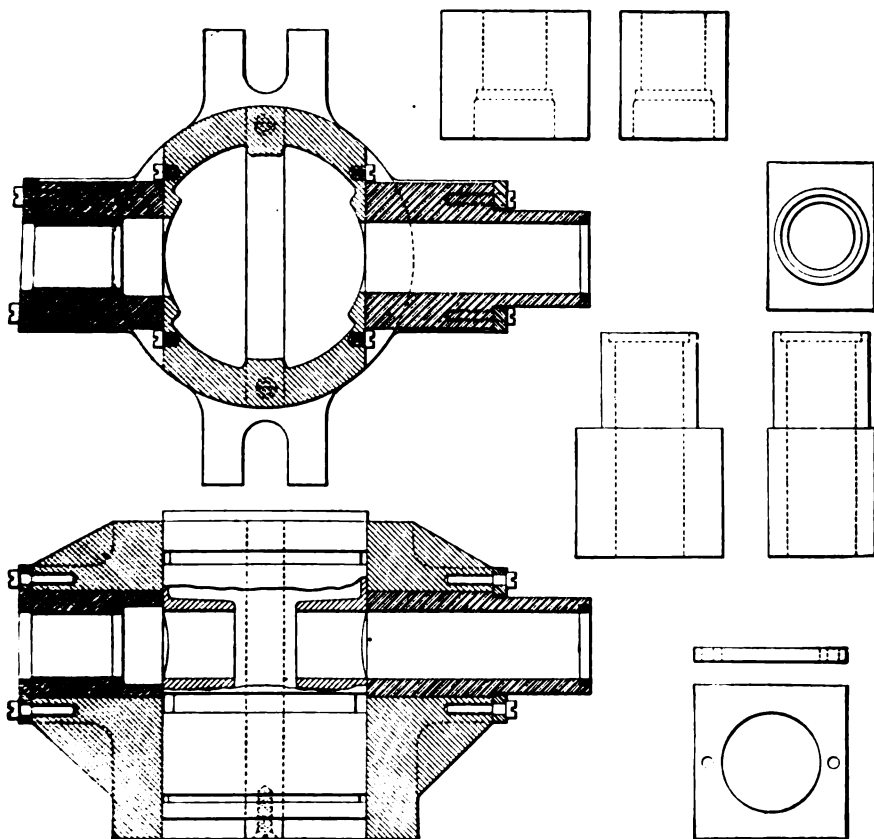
DETAILS OF LINE-REAMING FIXTURE
